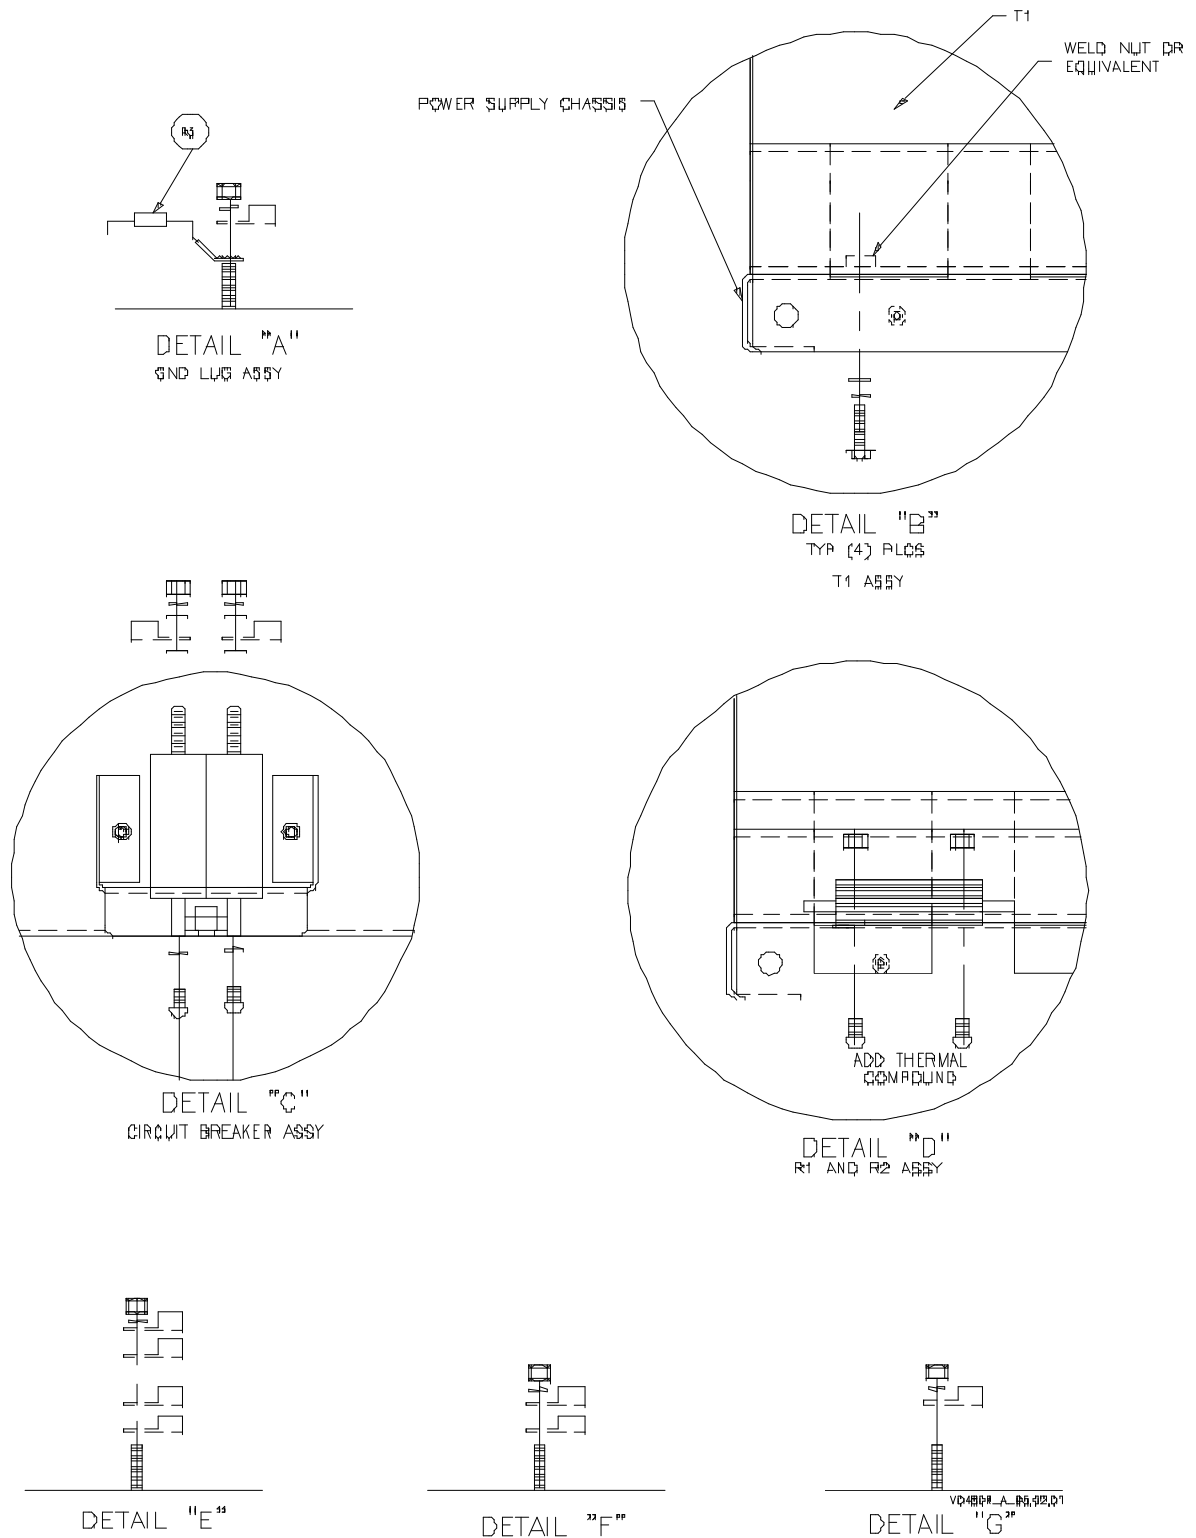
Gold Line 90A Power Supply Assembly 265-0082-006
